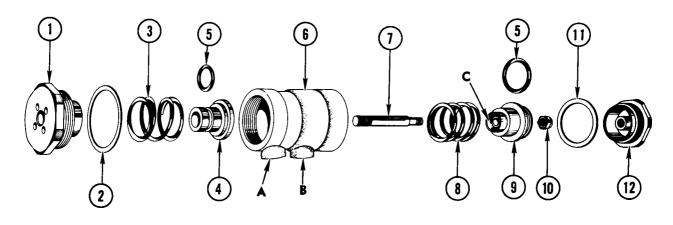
RELEASE VALVE (WAGNER), EXPLODED
